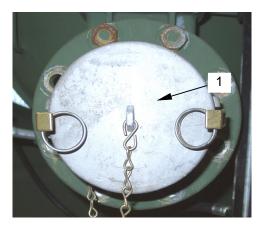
Installing Dust Cap/Hose and Hydraulic Line
